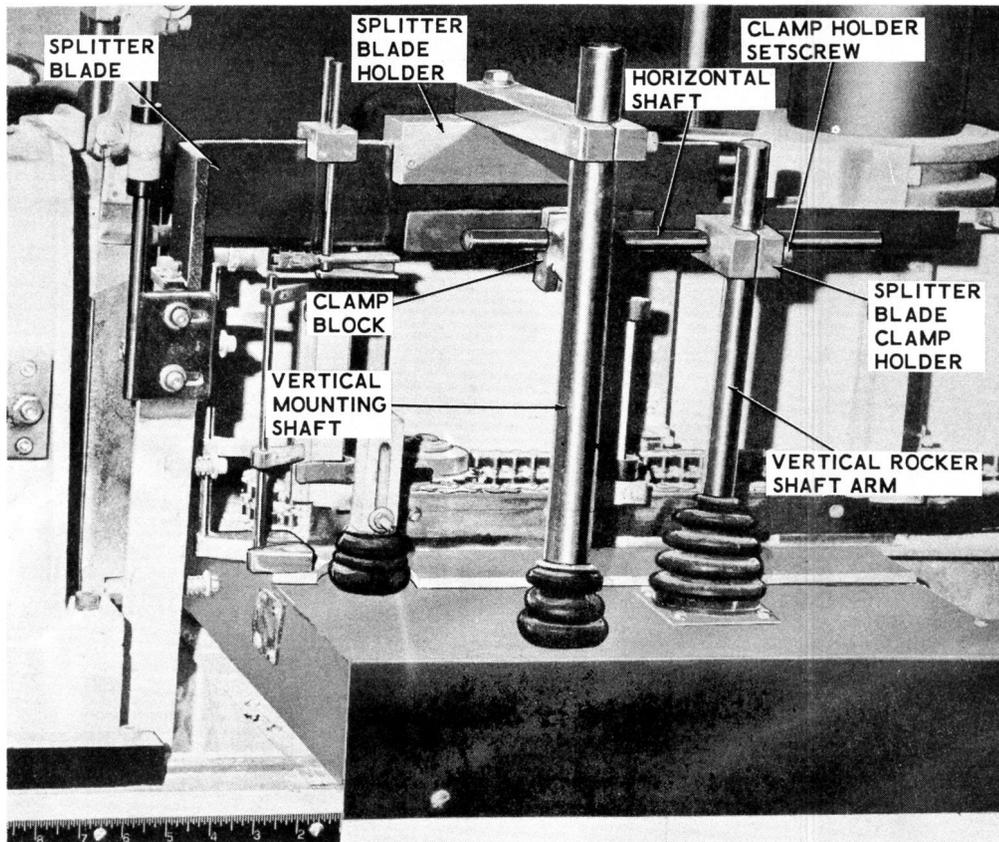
Air Jet Splitter Blade and Clamp Adjustment
